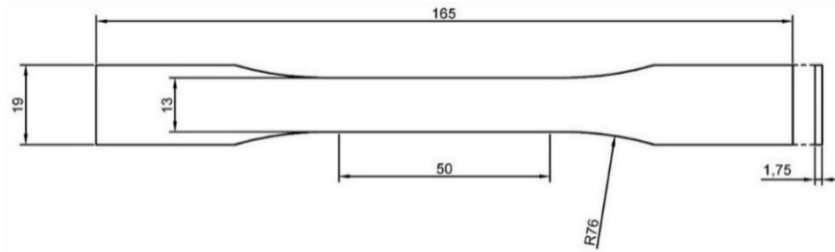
ASTM D638 Specimen shape with dimensions in mm
